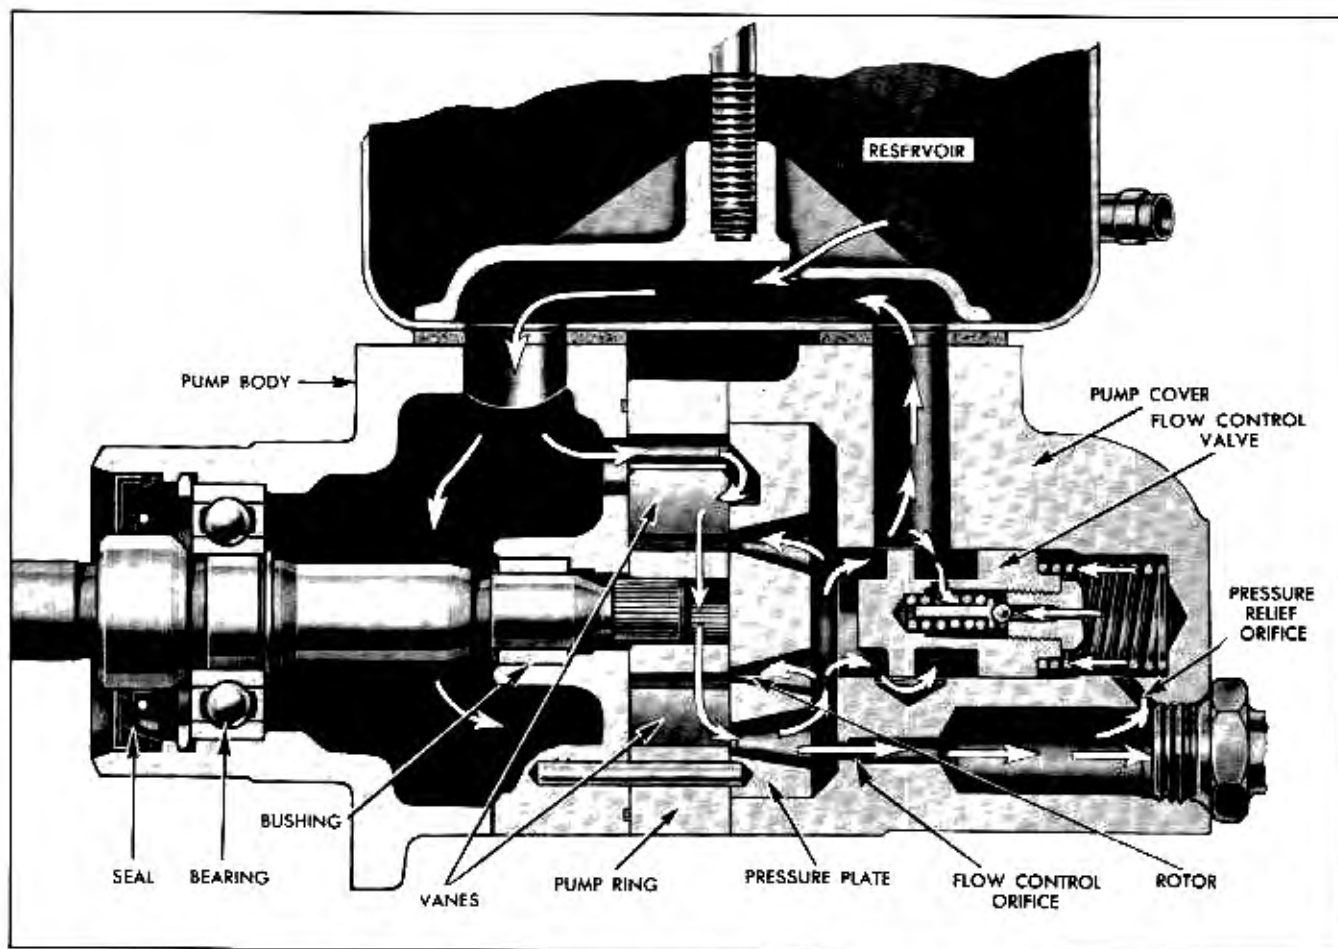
Power Steering Pump. Straight Ahead Position--Schematic View
